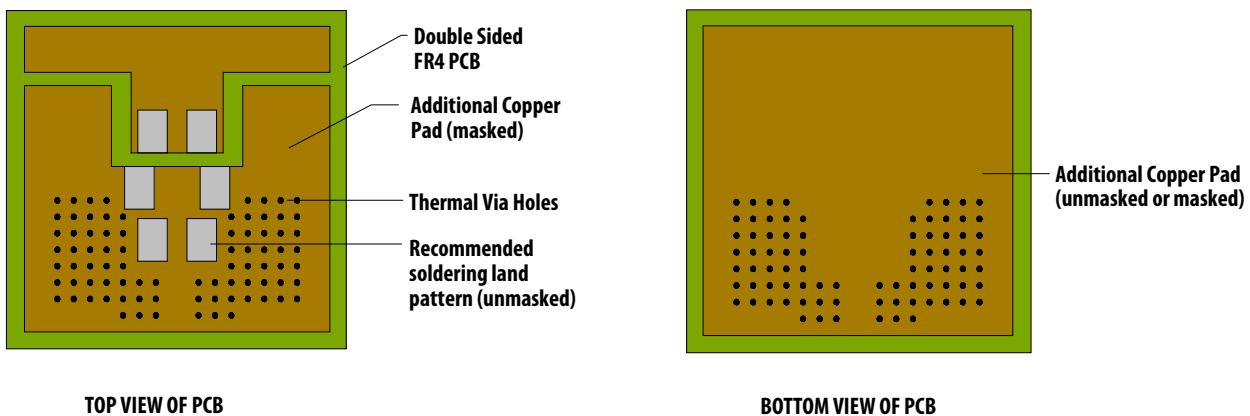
Double sided FR4 PCB with additional copper pad and thermal via.
